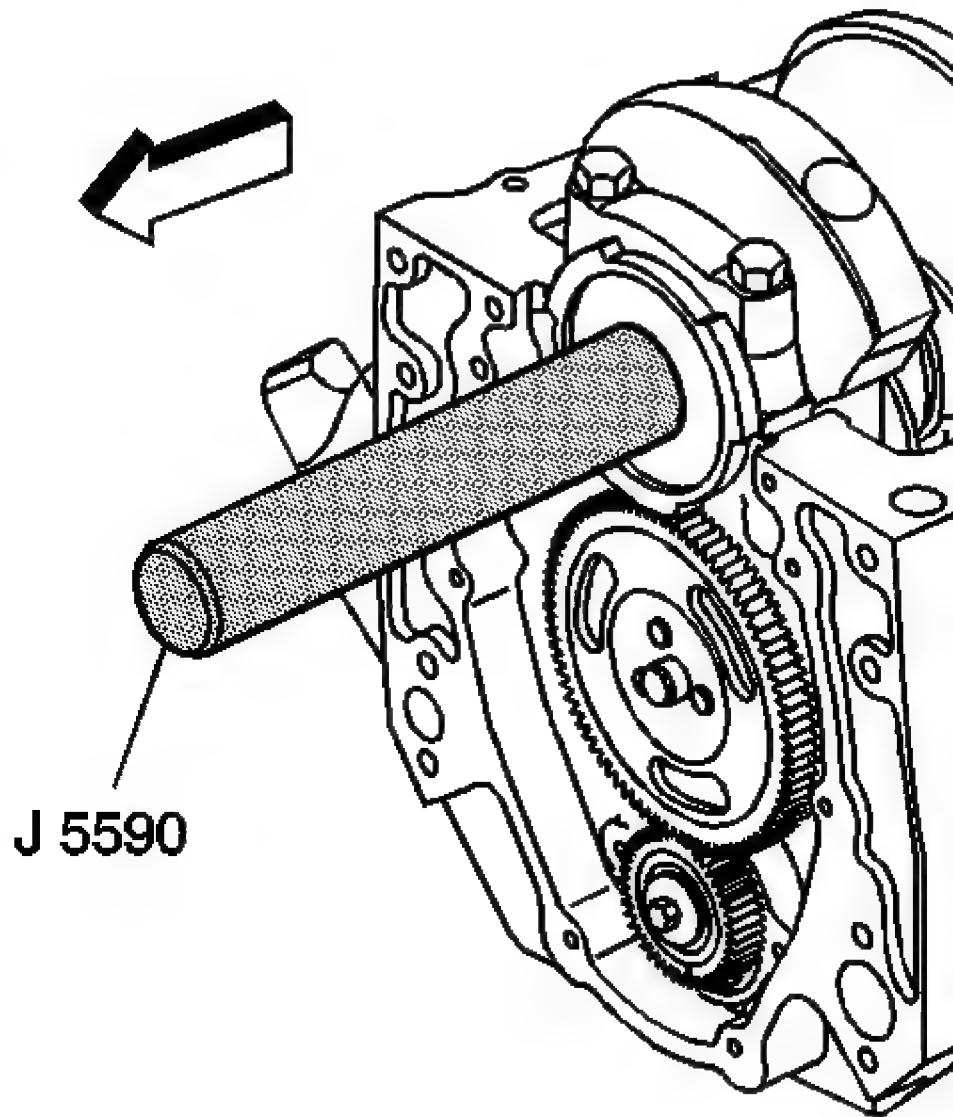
Installing Crankshaft Position Sensor Reluctor Ring
